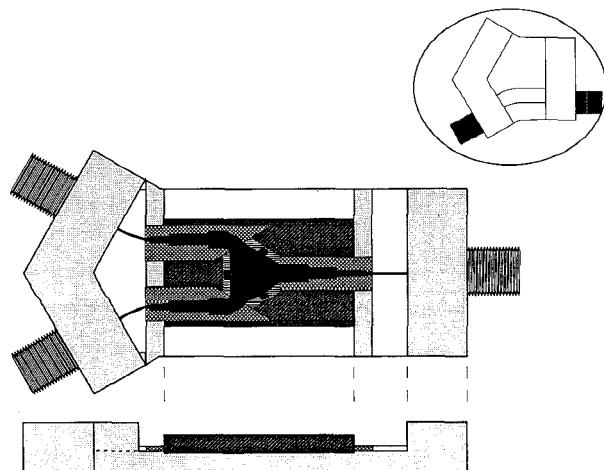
Circulator in Test Fixture. Upper right shows modified fixture used for deembedding.
